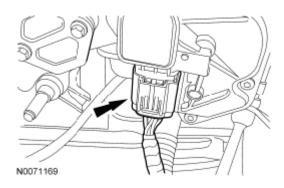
Locating Throttle Control Electrical Connector Courtesy of FORD MOTOR CO.
